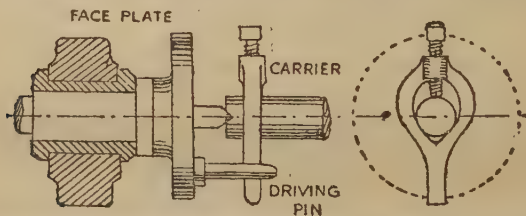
SPINDLE WITH CARRIER FROM THE FACE PLATE
